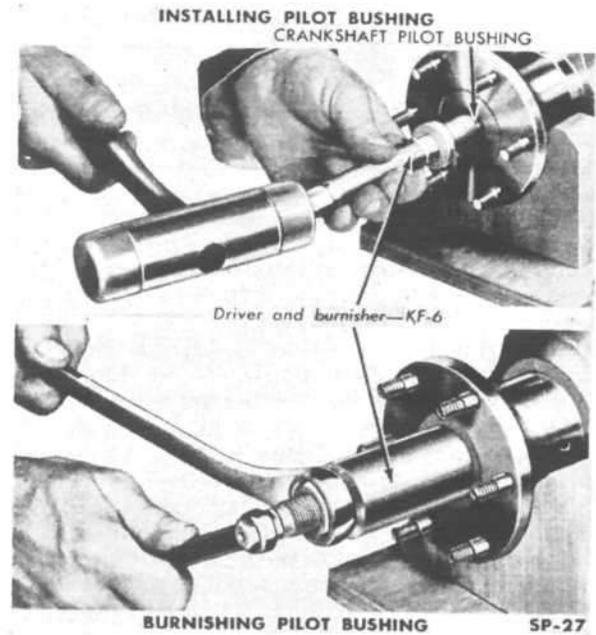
INSTALLING AND BURNISHING CRANKSHAFT PILOT BUSHING
